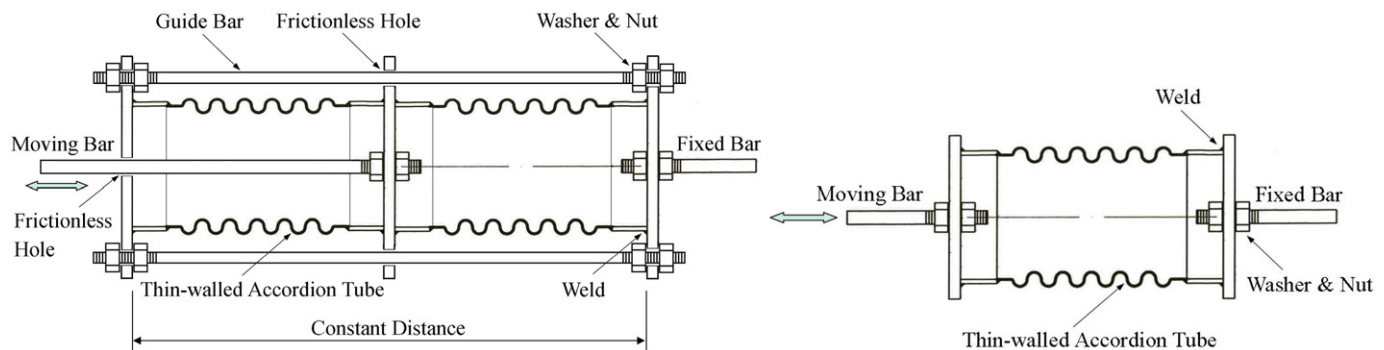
Schematic view of the specimens prior testing: a) coupled specimen; b) single specimen.
